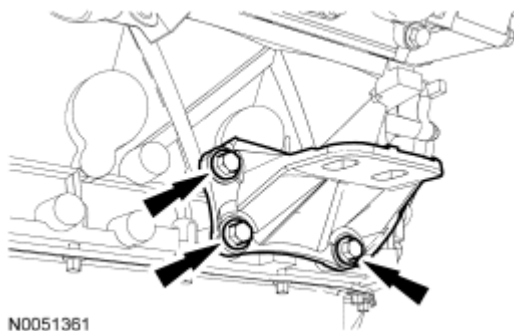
Locating Bolts & RH Engine Support Insulator Bracket
